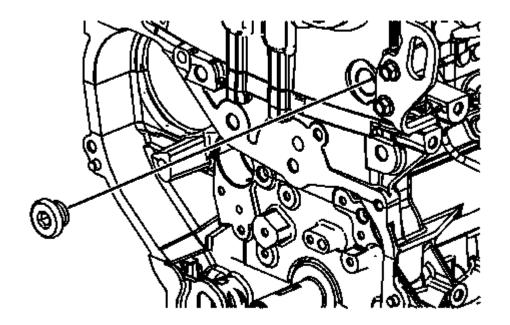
View Of Oil Nozzle & Bolt Courtesy of GENERAL MOTORS CORP.
